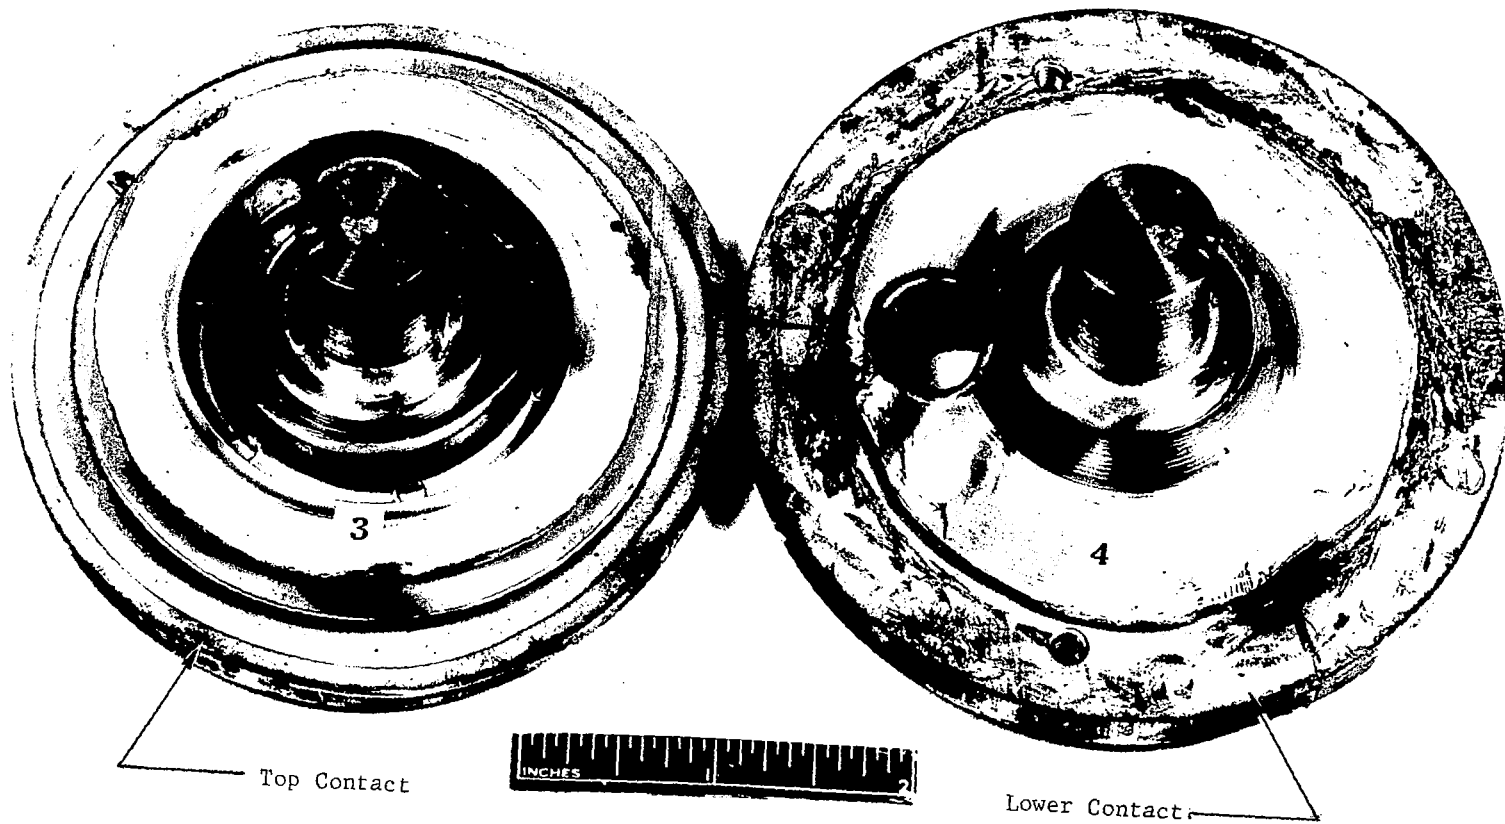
AC Contact Fixture Capsule End Flanges with the Molybdenum Contact Surfaces Showing Slight Pitting from Passage of Test Current While in Closed Position.
